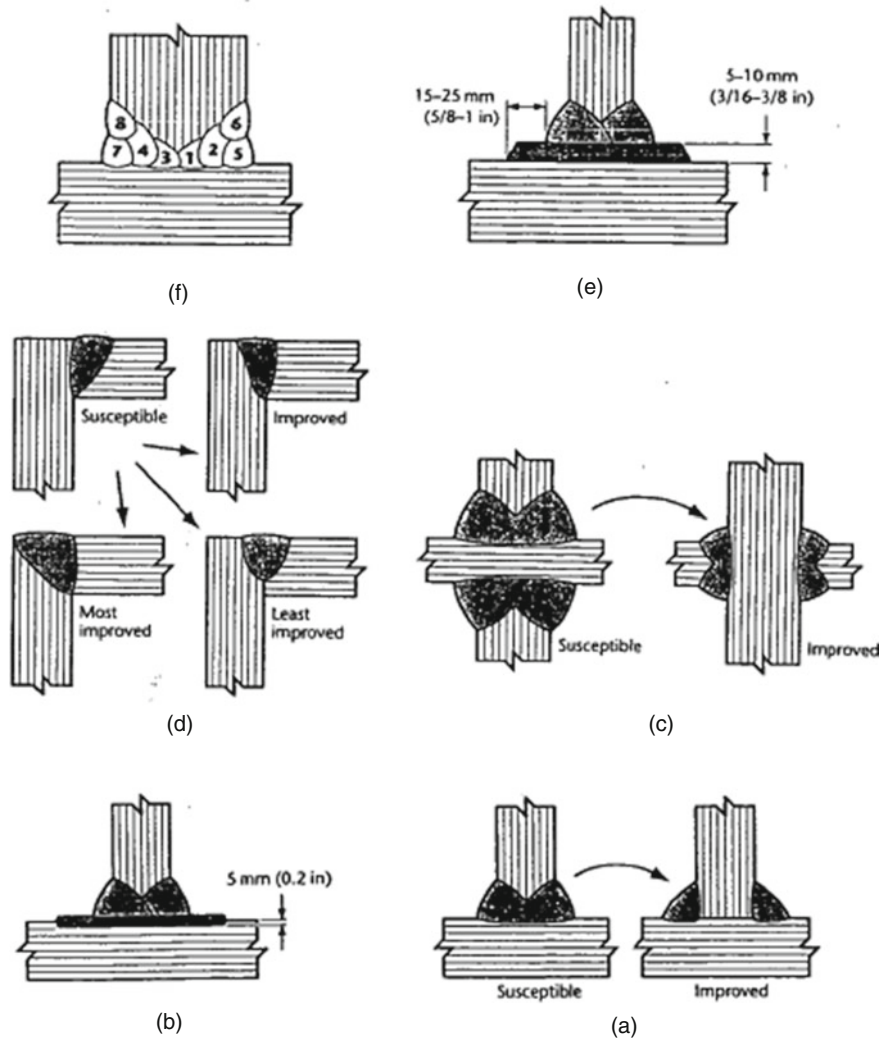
Prevention of lamellar tearing. (a) Use of fillet welds in preference to complete joint penetration groove welds. (b) Buttering of a joint by removal of susceptible material. (c) Reducing the weld size by placing in the thinner plate. (d) Selecting a joint to minimize through thickness strain. (e) Buttering of the joint. (f) Symmetrical deposition of weld passes. (Source: ASM Metal Handbook, Vol. 6)
